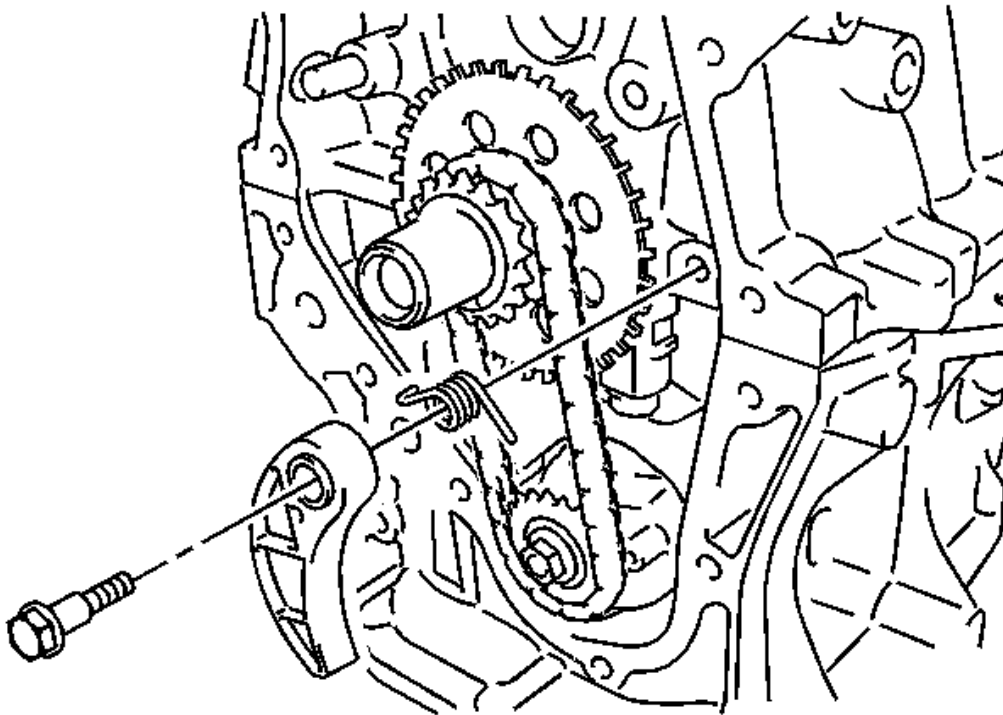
View Of Chain Tensioner Plate, Spring & Bolt
